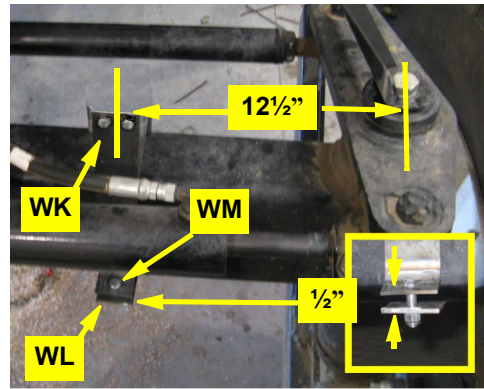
with inset: WAS assembly mounting bracket location and (inset) brackets gap
